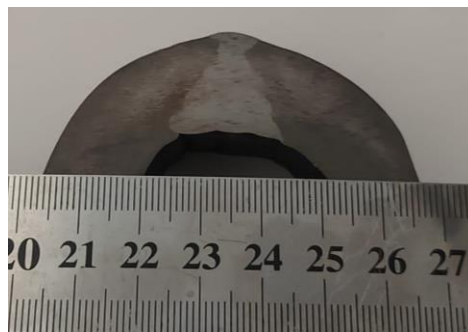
A welded specimen, which was bent to 180° around the weld face
